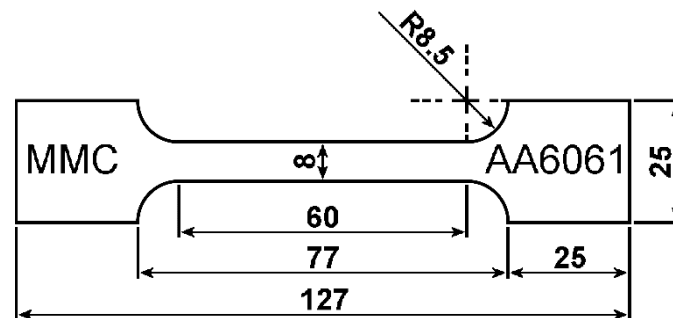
Dimensions (in mm) of tensile test specimens machined from the welded samples.
